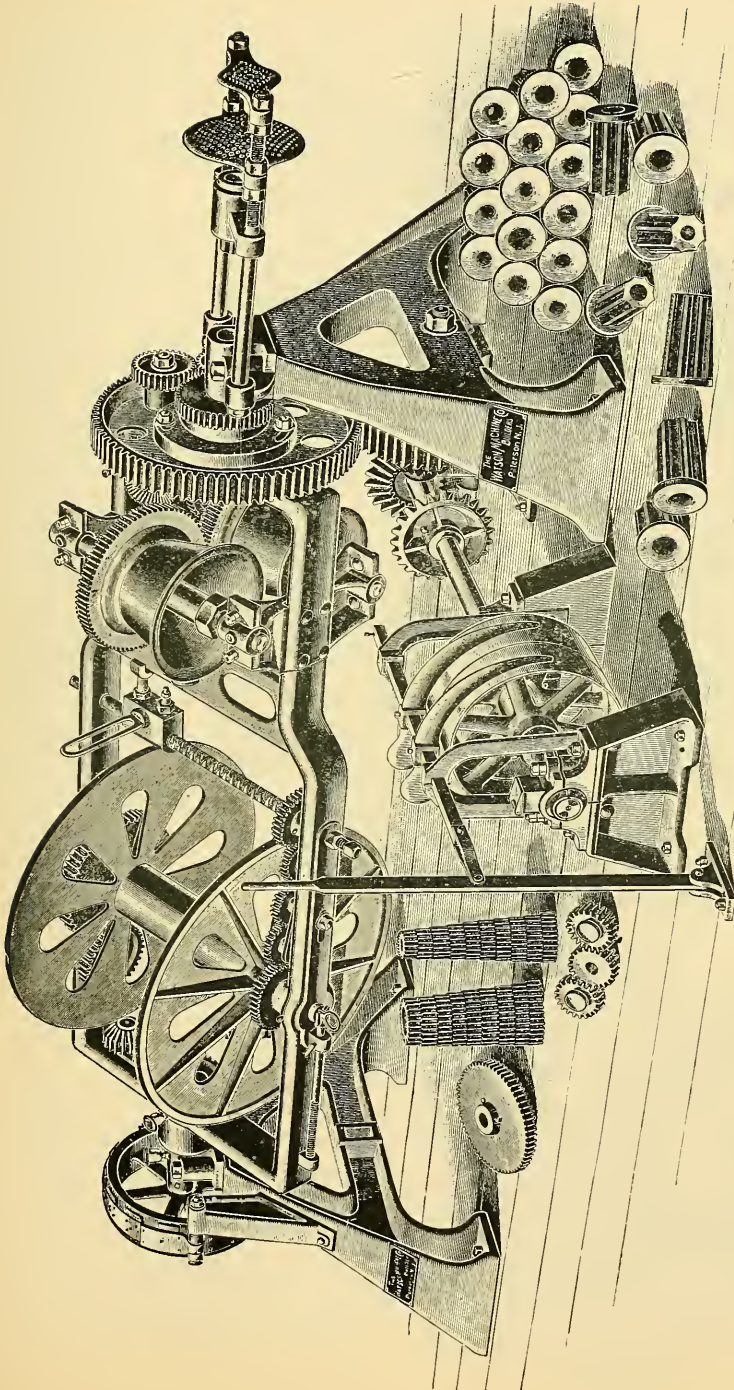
Horizontal strand forming machine to make strands from $\frac{3}{4}$ inch diameter to 2 inches diameter.
